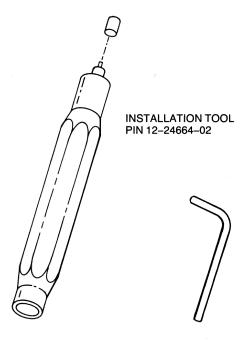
Transceiver Installation Kit Parts (Sheet 1 of 2)
